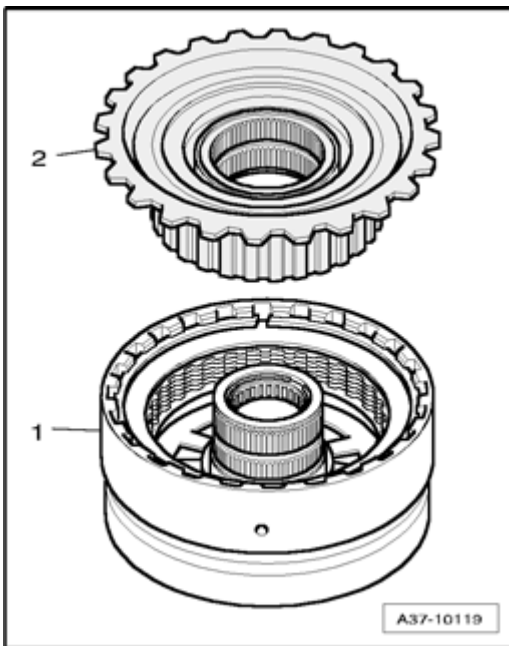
Freewheel 1st Gear And Cylinder "F"
